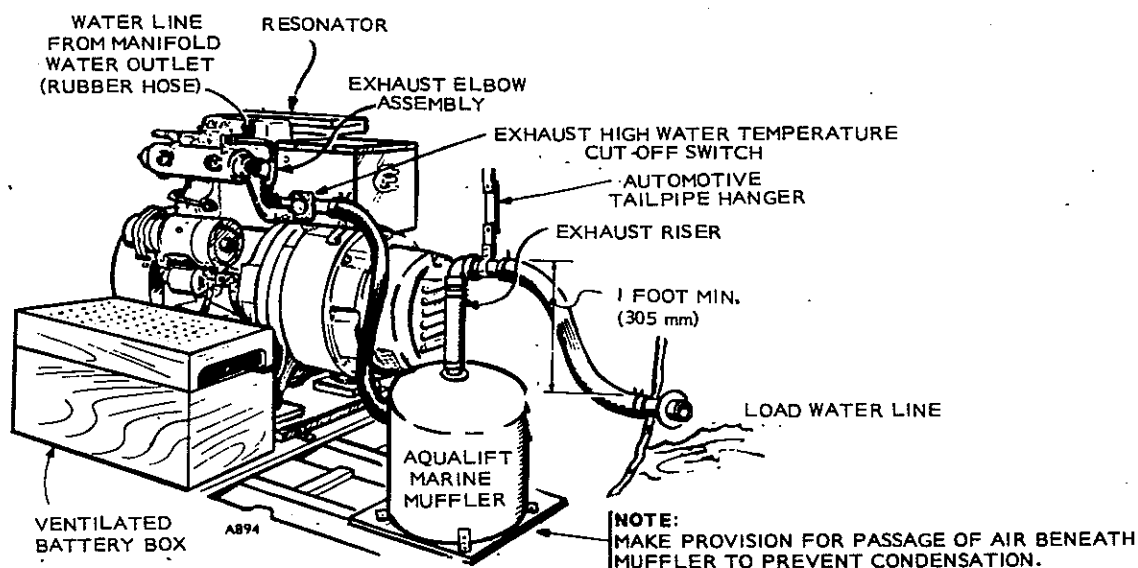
ABOVE-WATER-LINE INSTALLATION OF MDJB ELECTRIC PLANT
